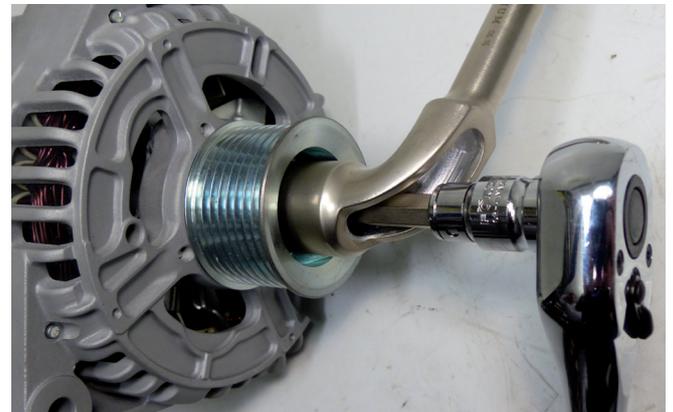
Always use a hold-down tool and torque spanner to tighten the pulley.
